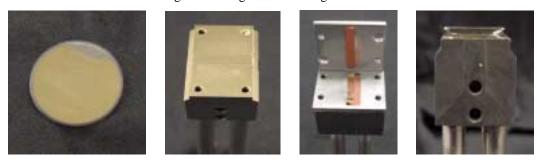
From left to right: first successful YAG coupon, ready cooler, precision solder fixture, fully coated slab and cooler tested at 590 W/cm² with no signs of damage.
